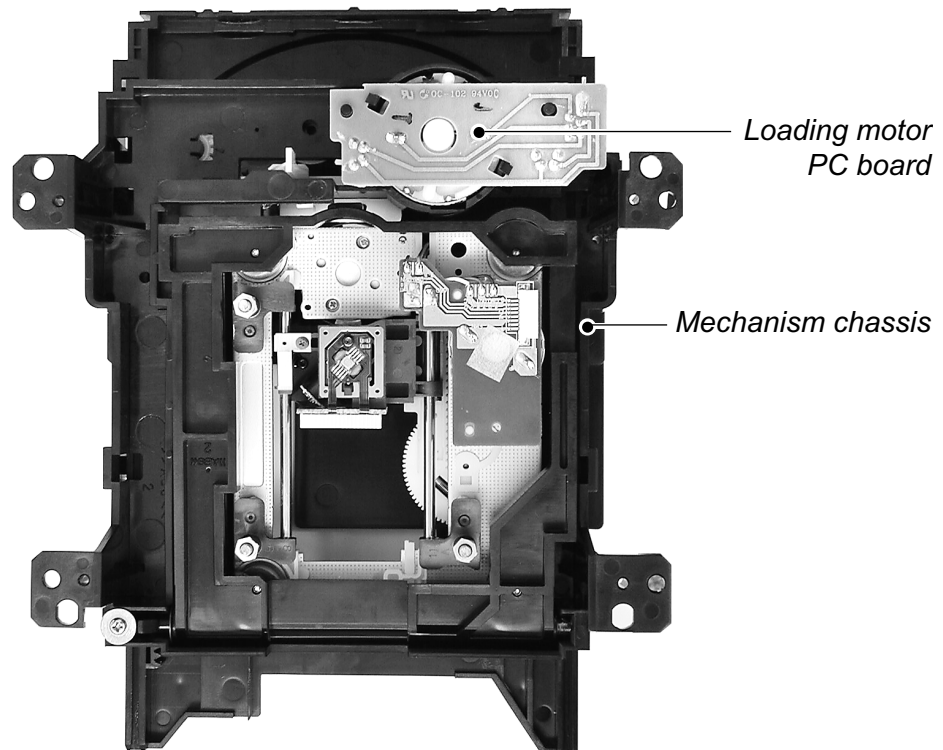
Mechanism chassis assembly (Bottom side)
